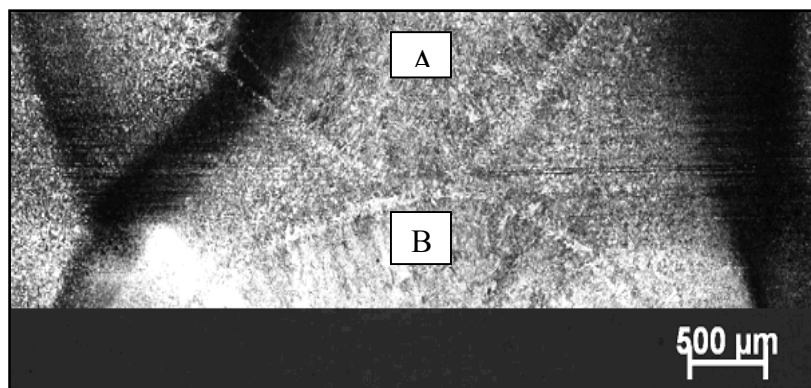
Macrograph of the cross-section of welded region / Dark tinted region is visible on both sides of weld seam/ A is 1st weld pass seam; B is 2nd weld pass seam. Etchant: W II (Wallner)
